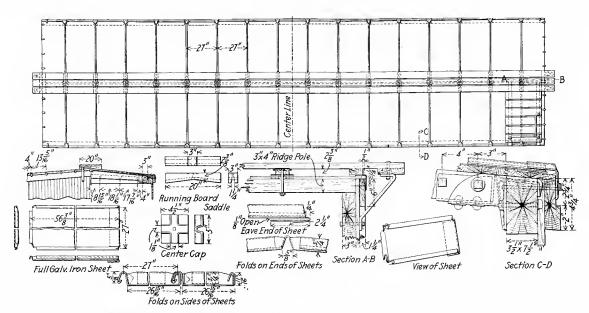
New Murphy Car Roof, Type XLA and Details, for Louisville & Nashville Box Cars. Standard Railway Equipment Company.
